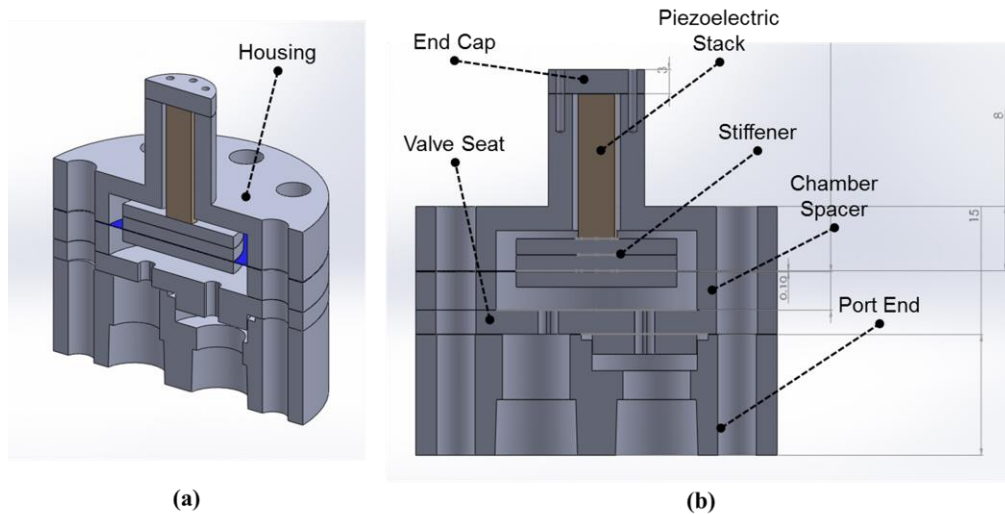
(a) Isometric center-cut view of the miniature piezohydraulic pump (b) front-cut view of the inside components of the pump
